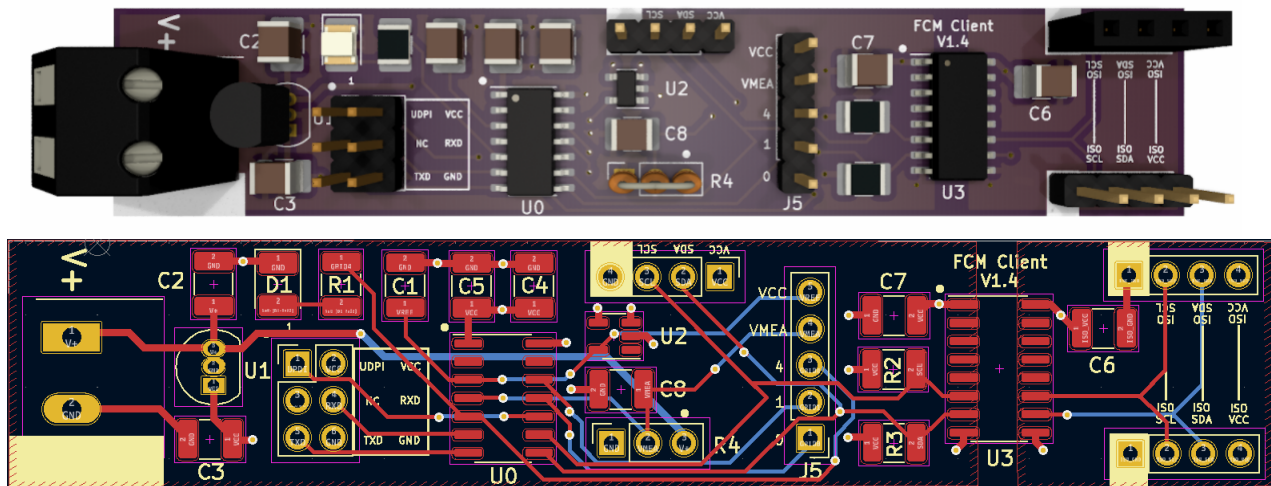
Top: KiCAD Client PCB 3D Preview Bottom: KiCAD PCB Layout
